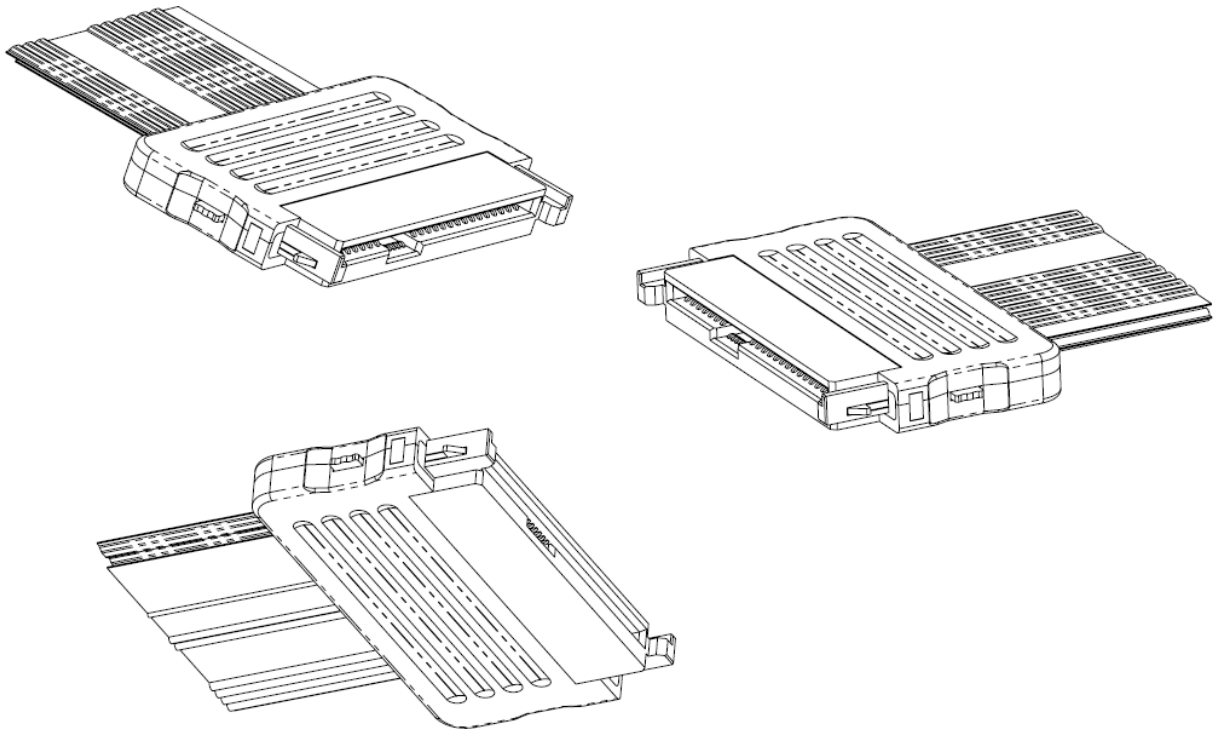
Cable Release Clearance - Representative Cable Housing
